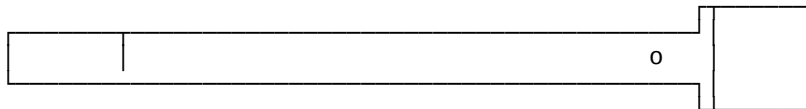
Pipe with one end flattened and fuse hole drilled. [Top view]
